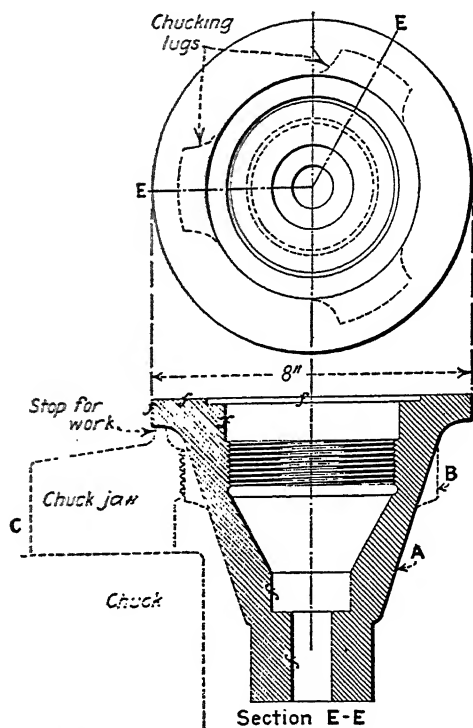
Addition of Chucking Lugs to Assist in Machining
